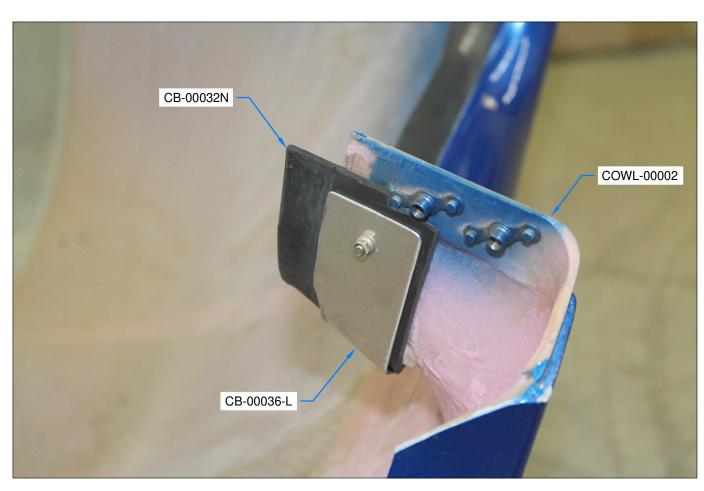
CLAMP INLET SEALS TO BOTTOM COWL (LEFT SIDE SHOWN WITH HARDWARE INSTALLED)
